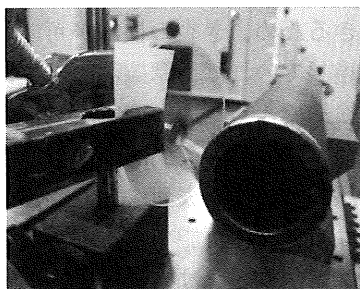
Metal vapor deposition on a shield glass plate by laser welding preliminary test
